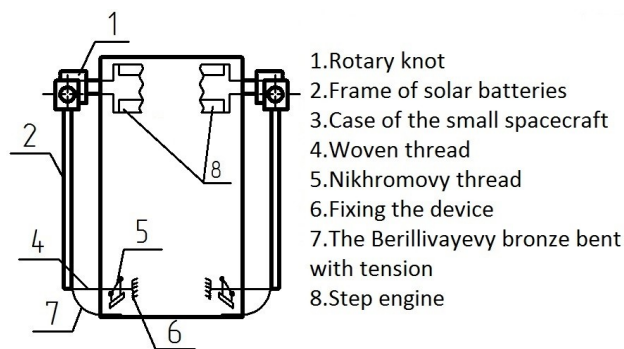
Mounting solar panels to the chassis frame of small spacecraft
